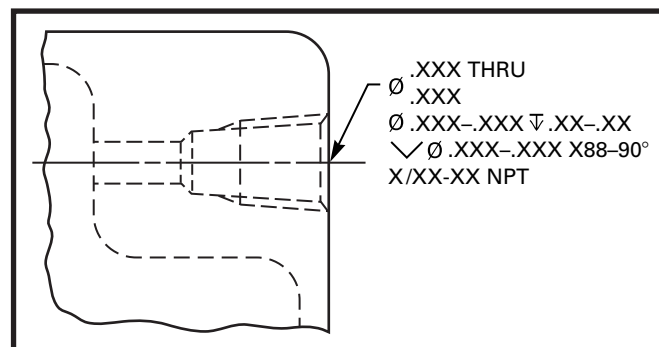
SPECIFYING INTERNAL THREAD WITH SPECIAL GAGING
